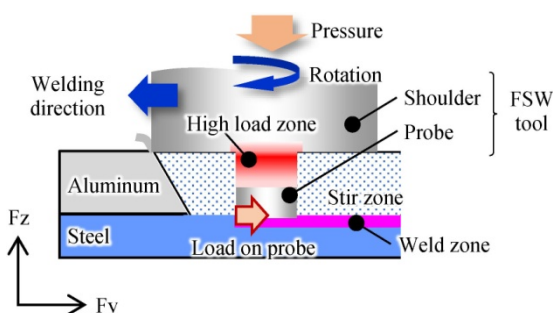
Schematic drawing of aluminum-steel FSW during welding
